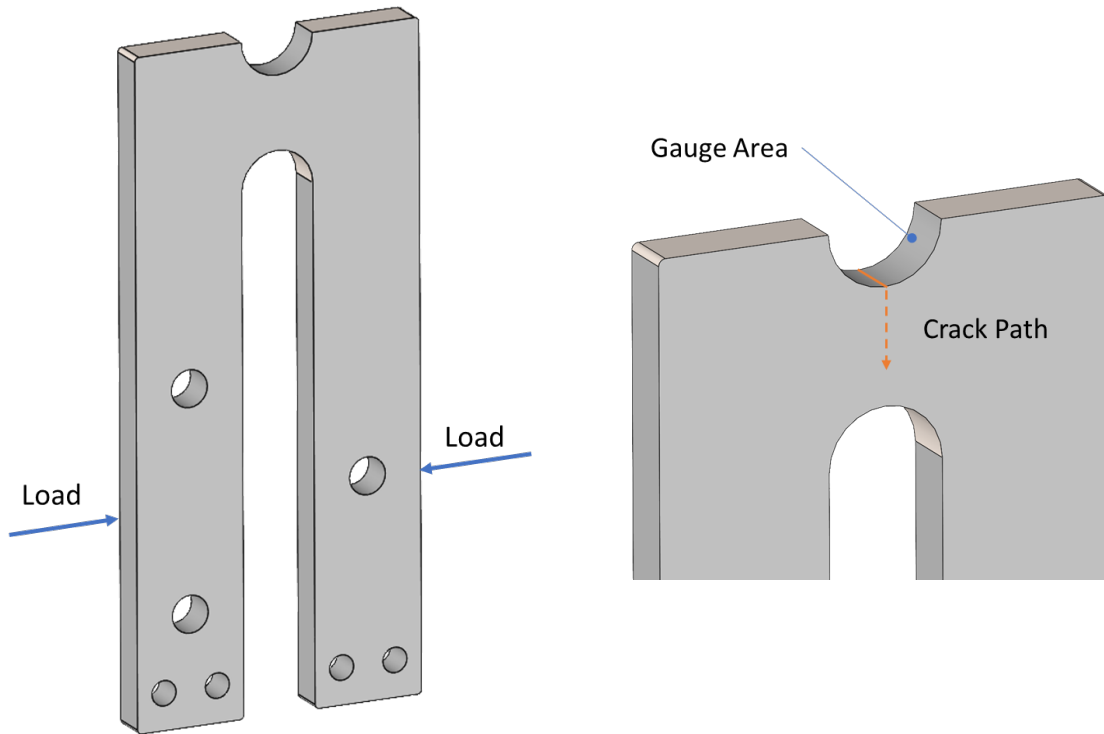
DCB sample with compressive loading (left) to promote Mode I cracking that initiates from the center of the gauge area (right).
